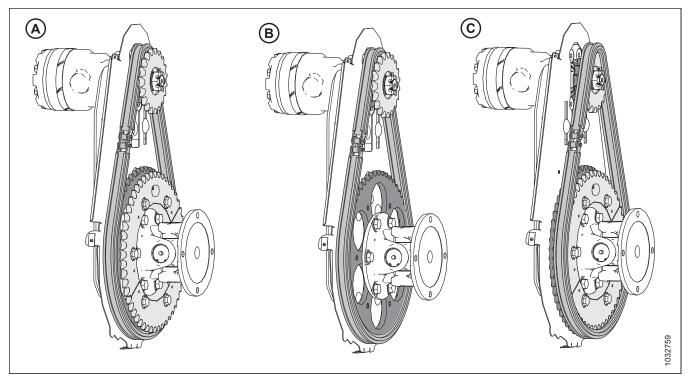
Reel Drive Configurations – Optional Dual Sprockets
